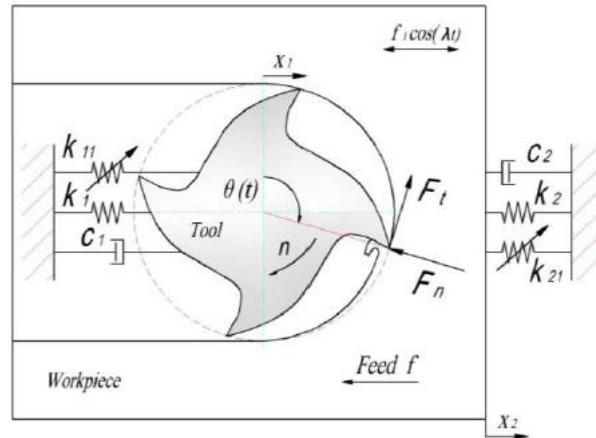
A 2 DOF Non-linear tool-workpiece milling model [159]
